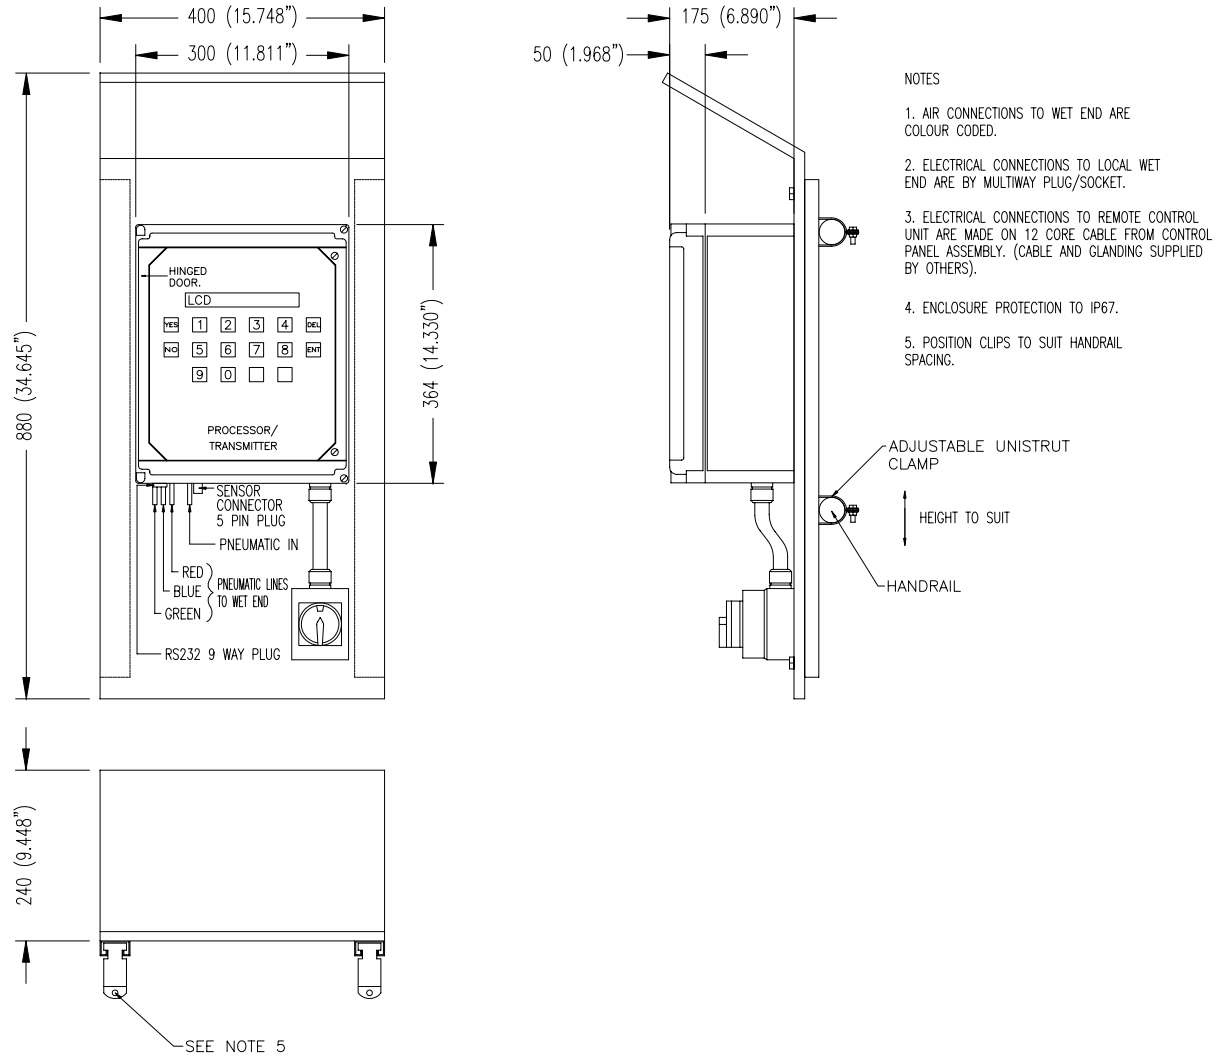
System Dimensions (with optional mounting panel) – units in millimetres
